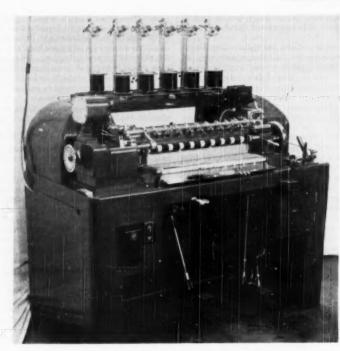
MULTIPLE WINDING OF IGNITION COILS IS CARRIED OUT ON THIS MACHINE
